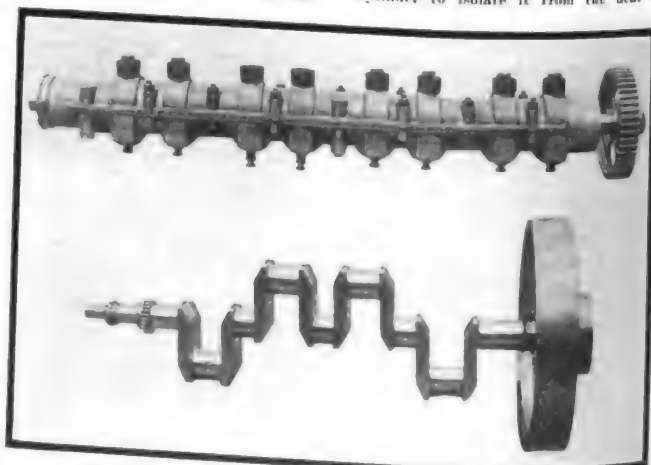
CAMSHAFT. FIG. 2—CRANKSHAFT USED ON PEUGEOT RACER
